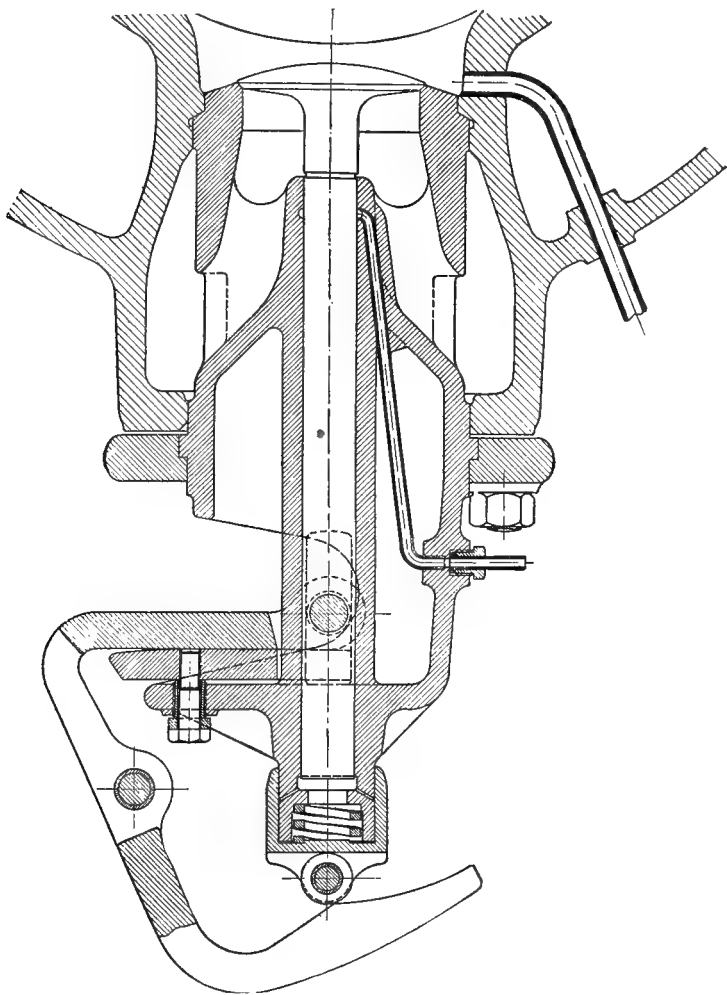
Arrangement of Inlet Valve at Bottom End of Cylinder (Reichenbach).
